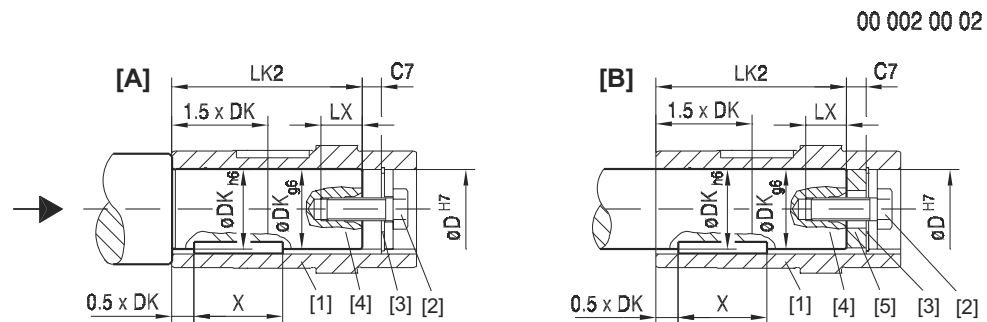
Customer shaft with contact shoulder [A] and without contact shoulder [B]
